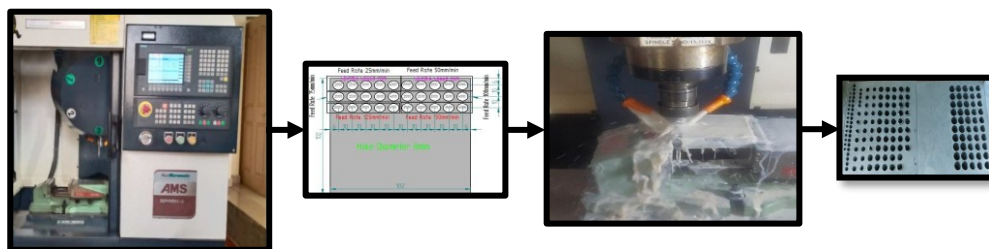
The sequence of steps in material preparation and drilling of the Al-7075 workpiece
